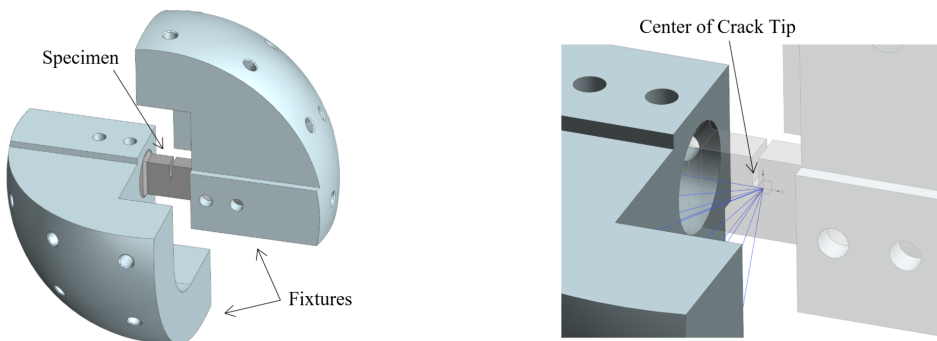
Left: Assembly of AFM Fixture and Specimen, Right: Sketches crossing at the center of specimen crack tip
